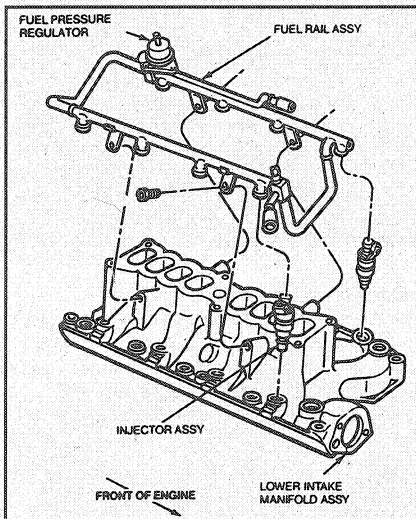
Fuel rail (fuel supply manifold)—5.0L engine
